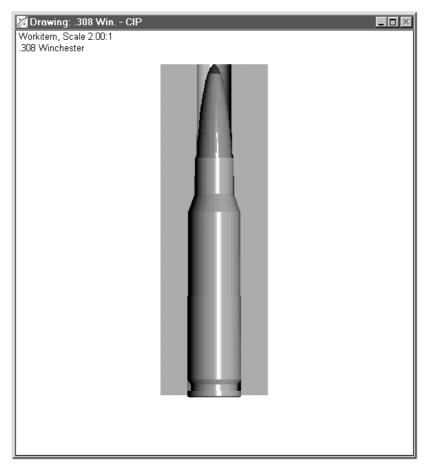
Chamber Outline Drawing with Metrics and CIP Symbols
